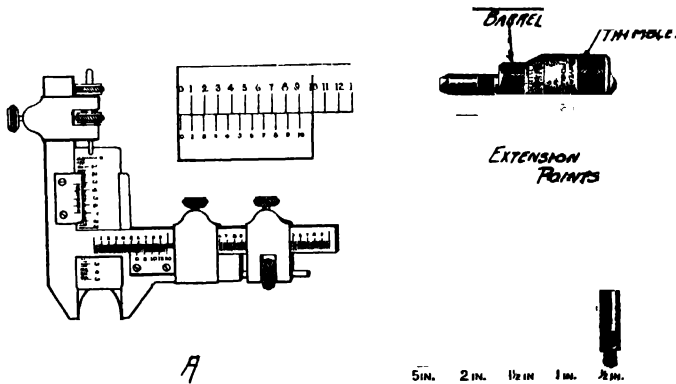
At Left, Special Form of Vernier Caliper for Measuring Gear Teeth; at Right, Micrometer and Extension Points for Making Accurate Internal Measurements.
